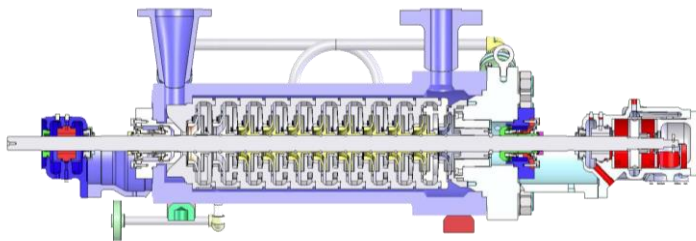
Charge Pump Cross-Sectional Drawing (Courtesy: Hydro-Aire, Inc.)
